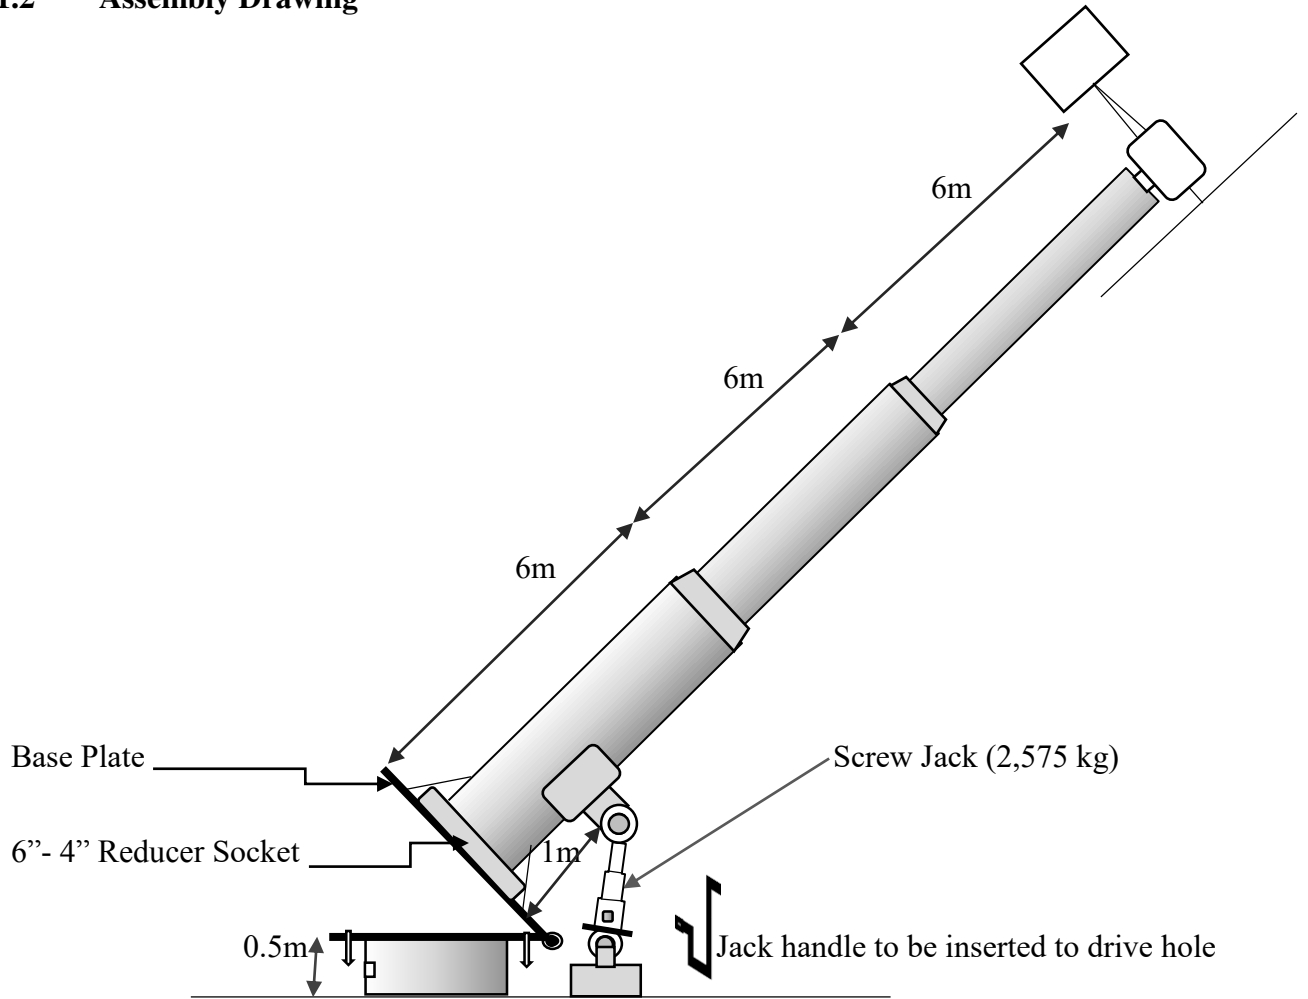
Assembly Drawing of a Self-Erecting Tower
